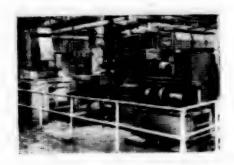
Section of machine tools with ChPU models 2R135F2, 6R13F3-01 and MA396F3 for machining parts that have curved surfaces.
